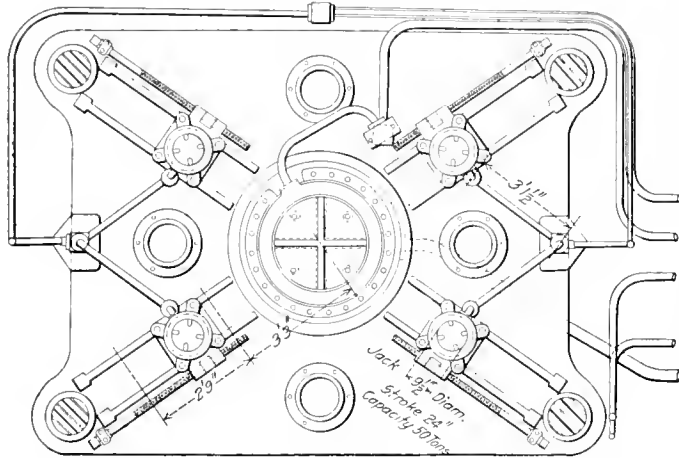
Plan of Flange Press Showing the Four Auxiliary Plungers.
